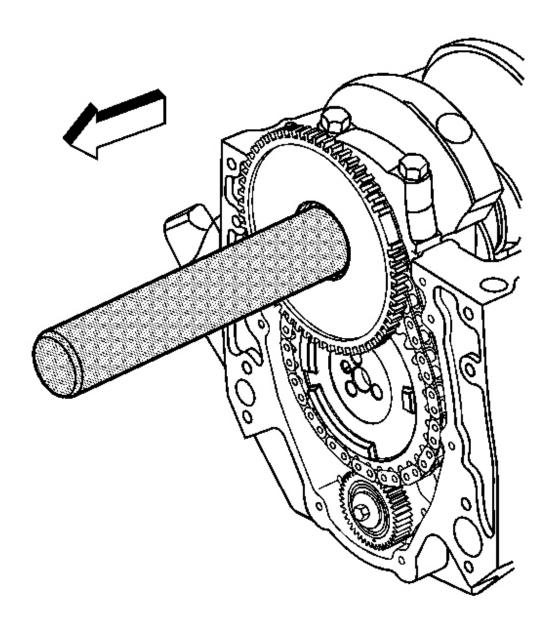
Installing Crankshaft Position Sensor Reluctor Ring Courtesy of GENERAL MOTORS CORP.
